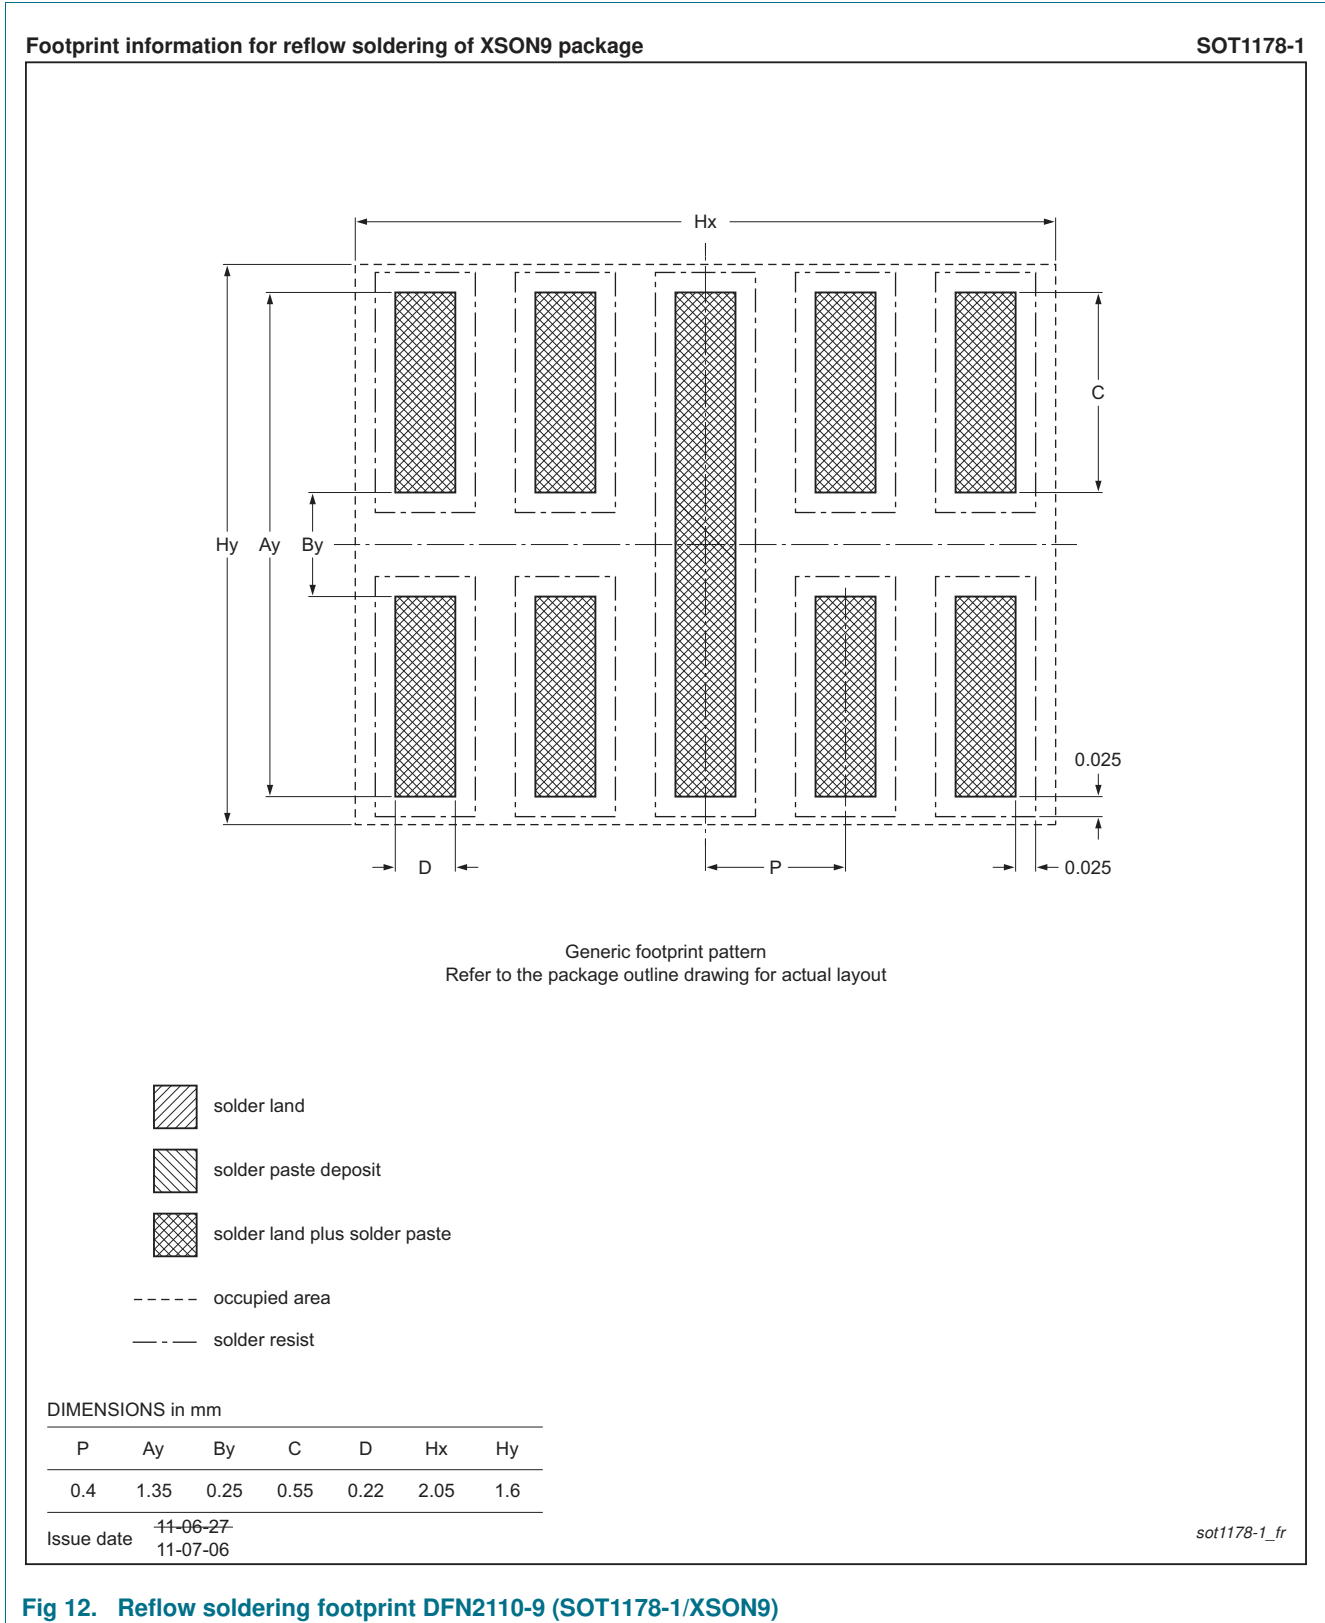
Reflow soldering footprint DFN2110-9 (SOT1178-1/XSON9)
